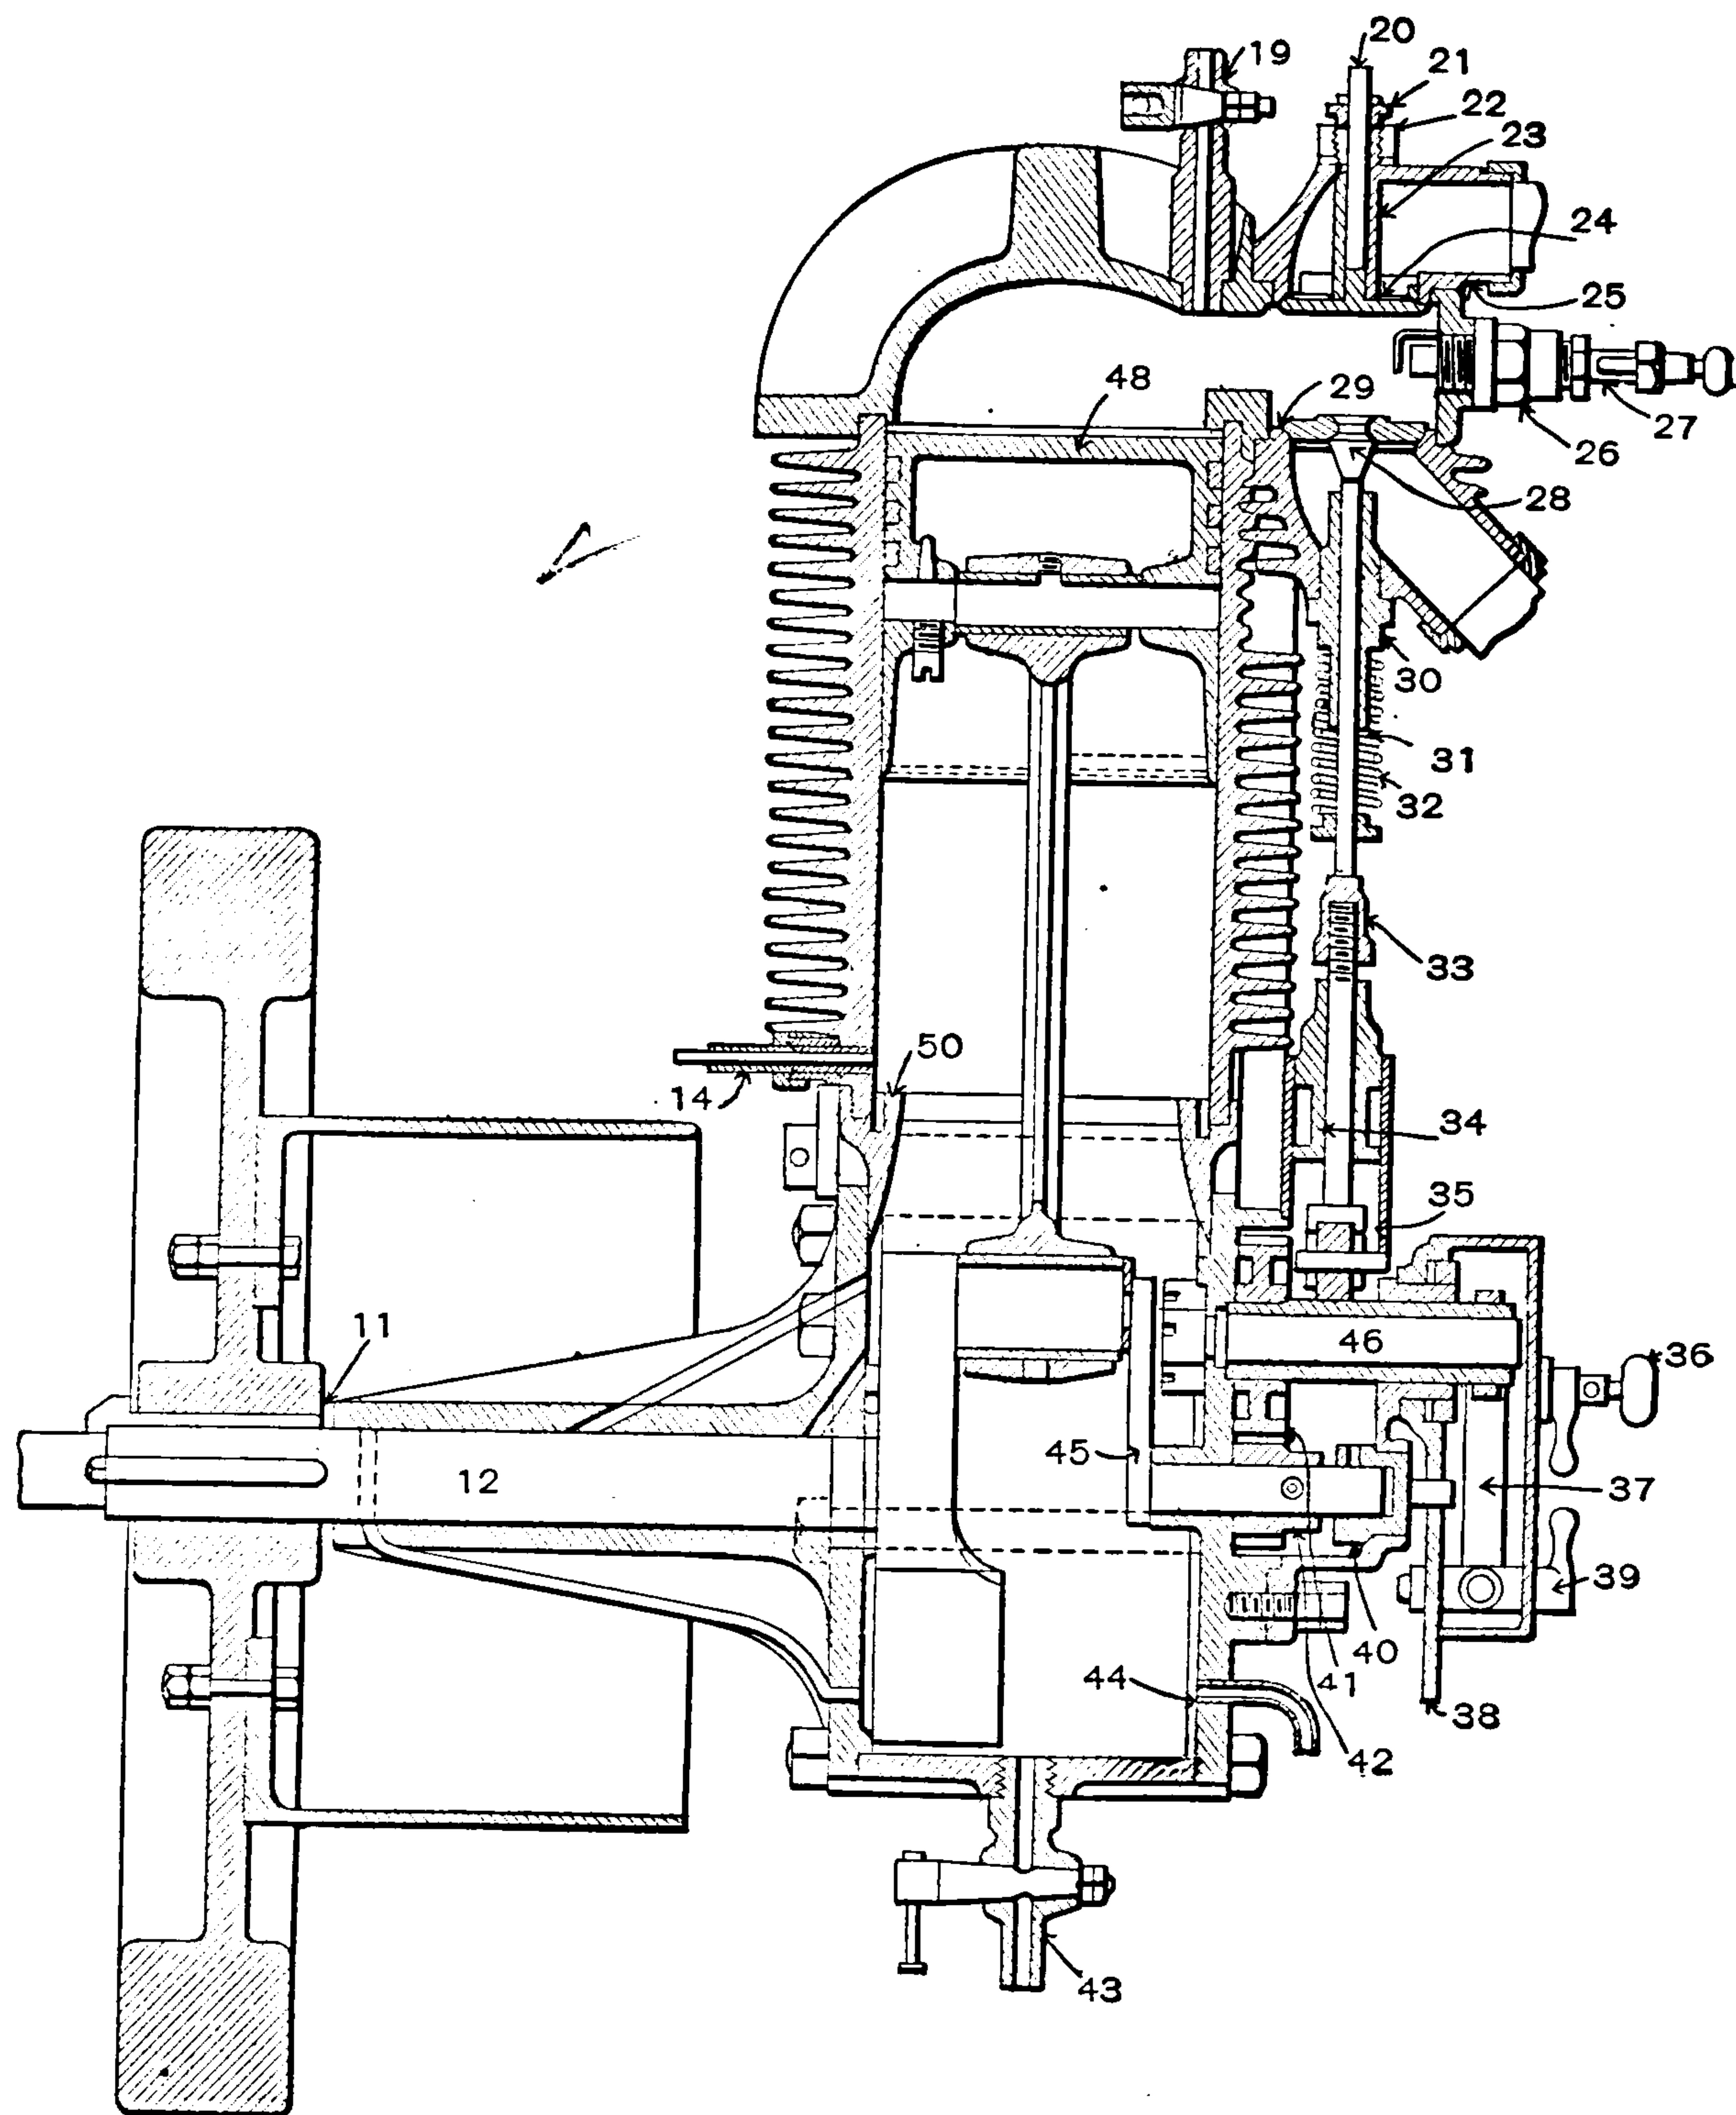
IP.—SECTION OF AIR-COOLED MOTOR.
